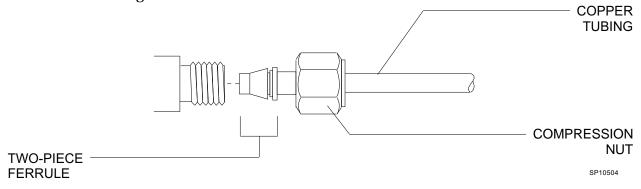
ASSEMBLY OF SWAGELOK FITTINGS
